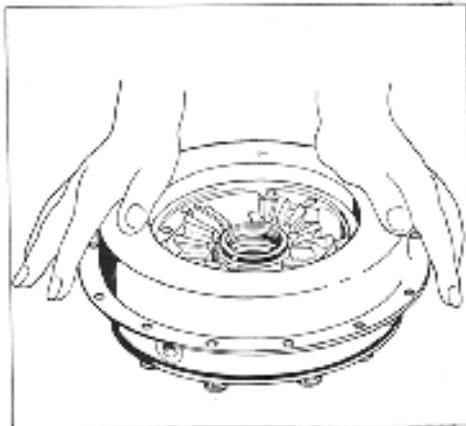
Installing Clutch Cylinders on Bevel Gear Carrier
